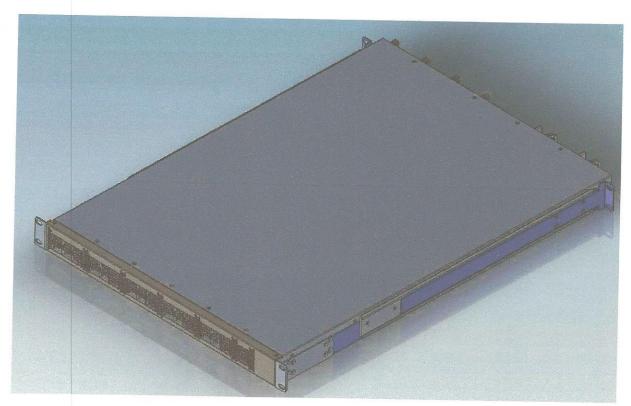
Example of OCP Open Switch Chassis for a Spine Switch
